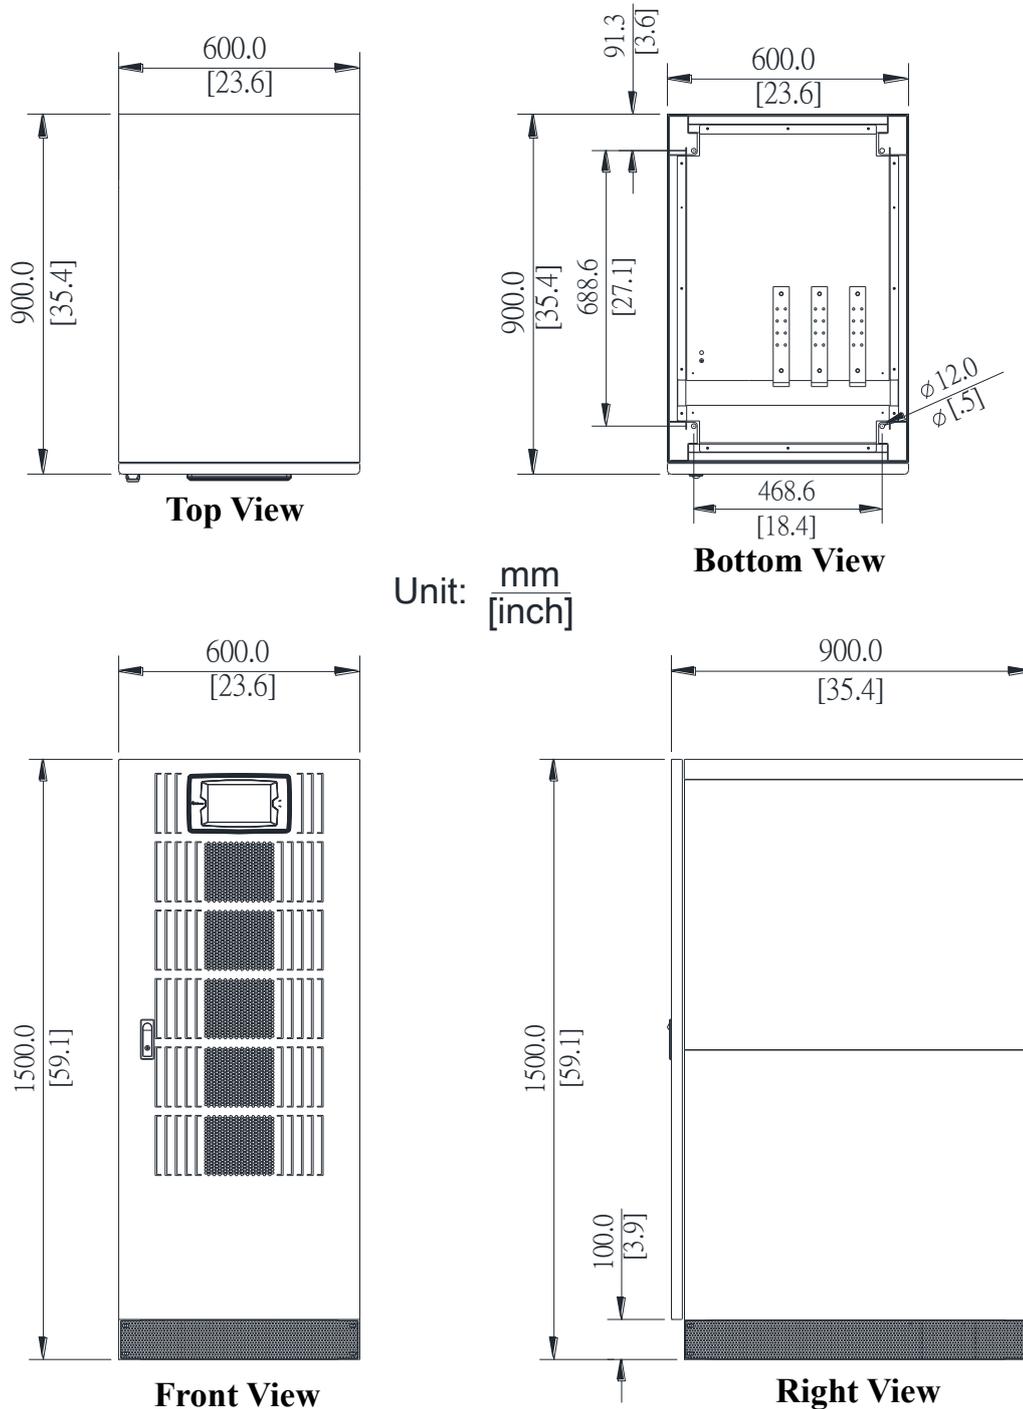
Dimensions of the 3P3W 1500mm Height Cabinet
